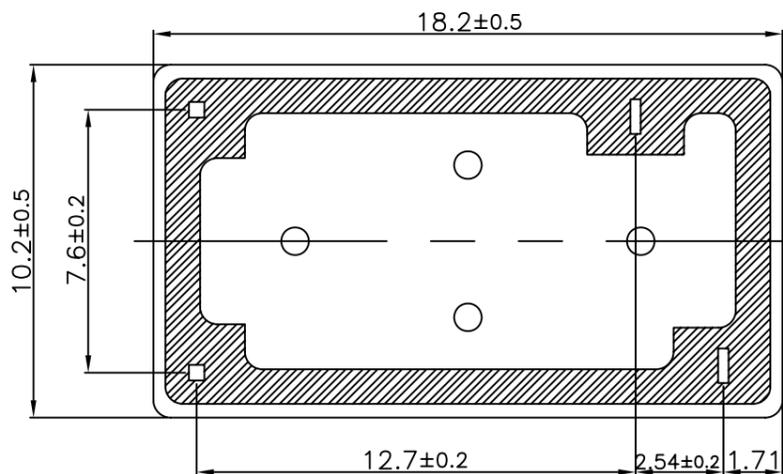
FIGURE FOR PRINTED CIRCUIT BOARD PROCESSING (BOTTOM VIEW)
